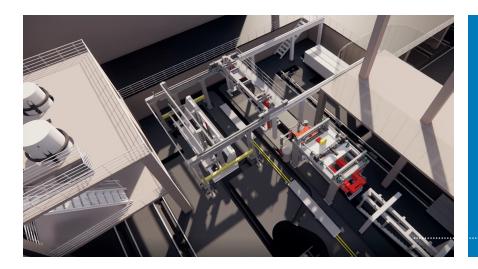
The equipment positions of each section in the AAC plant can be intuitively represented through BIM, providing a foundation for future layout optimization and adjustments.
